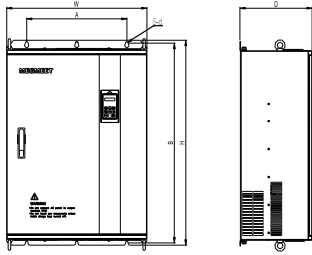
Outline, mounting dimensions for products of R9~R10
